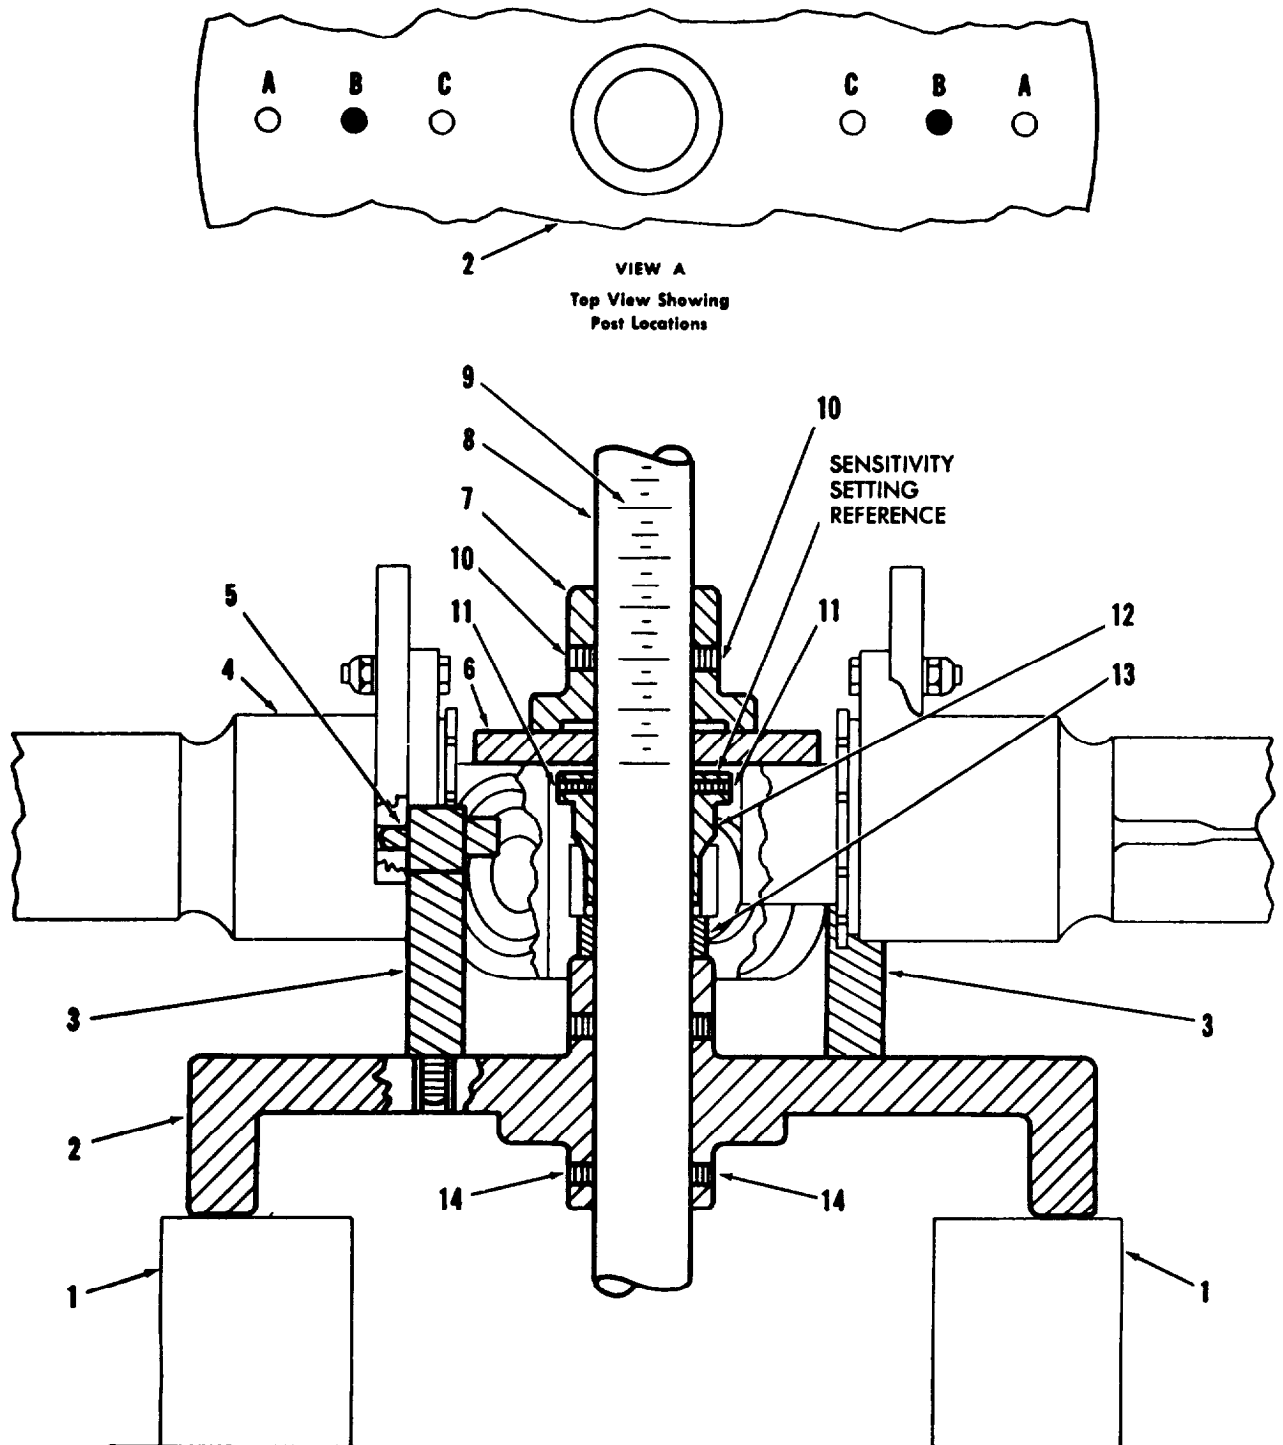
Balancer Installation - OH-13 (Series H, Serial No. 58-1497 and Subsequent) Helicopter Tail Rotor Hub and Blade Assembly.
